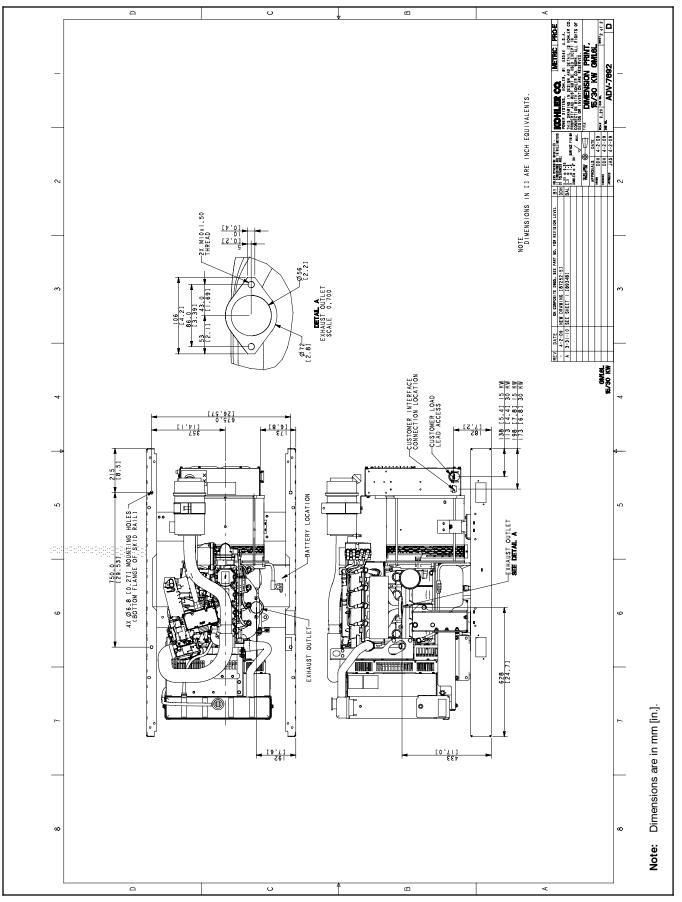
Dimension Drawing, ADV-7692, Sheet 2, Generator Set
